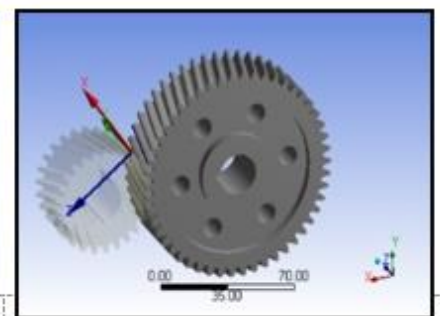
Visualization of joint applications on gears, shafts, and casing to represent rotational moment in both configurations.
